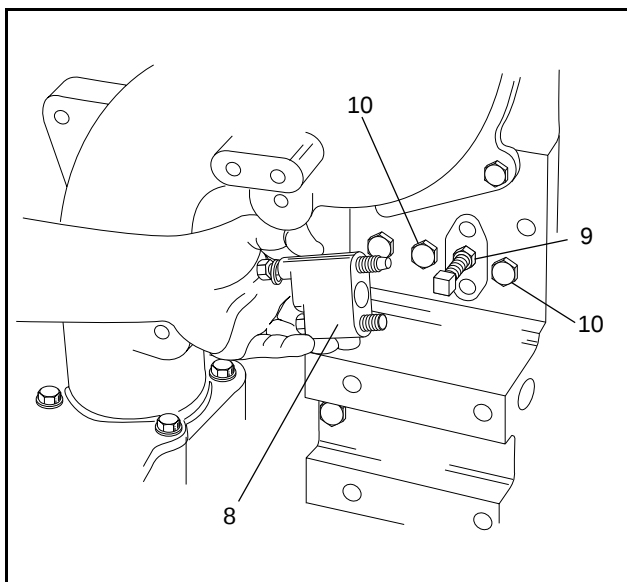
Typical Example Of Installing The Cover (8) Fuel setting cover. (9) Locknut. (10) Plugs.
